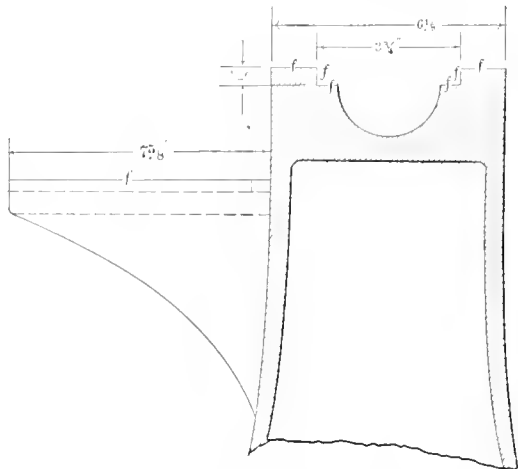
Cross Section through Milled part of Floor Grinder Base.
